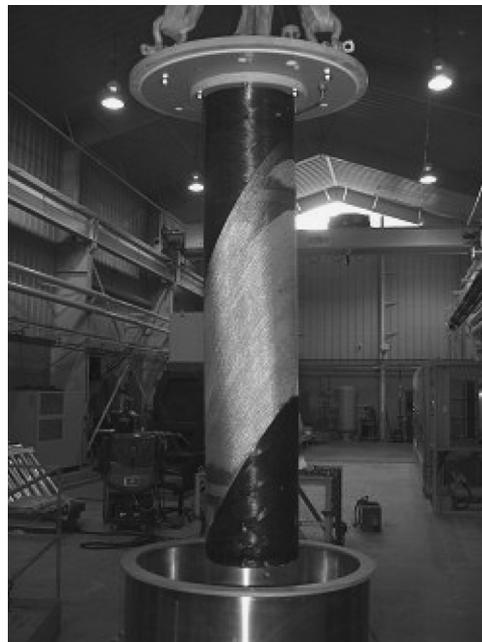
View of double-helix magnet assembly showing the outer helix.
